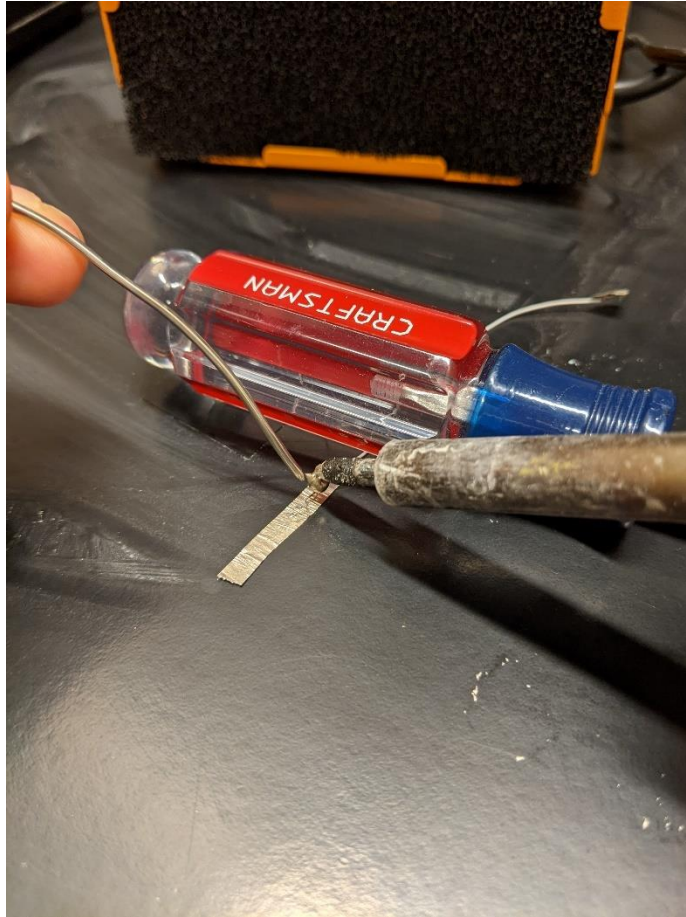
Photograph of a wire being soldered to a piece of Sn foil. The screwdriver is being used to pin down the open wire end to the Sn foil, and the solder is melted into a bead onto the soldering iron before being dabbed onto the Sn foil and the wire to create a secure connection. There is a vent fan in the background for fumes.
